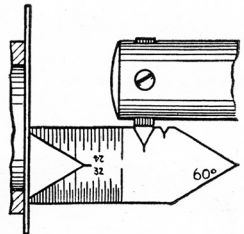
Cutter bit set square with work for cutting internal screw threads.
